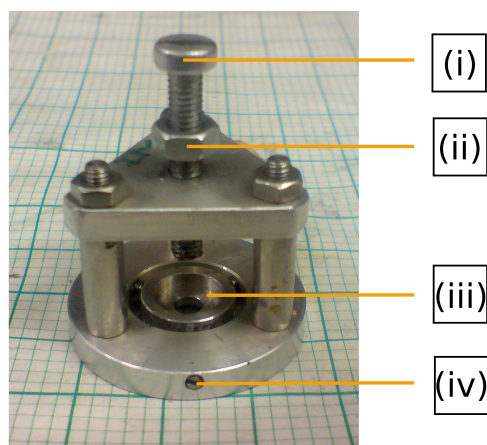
Gem alignment holder - Gem alignment holder for centring anvils on the backing plate. (i) Clamping screw, (ii) clamping screw lock nut, (iii) backing plate seat, (iv) lateral adjusting screws to centre backing plate on culet.
